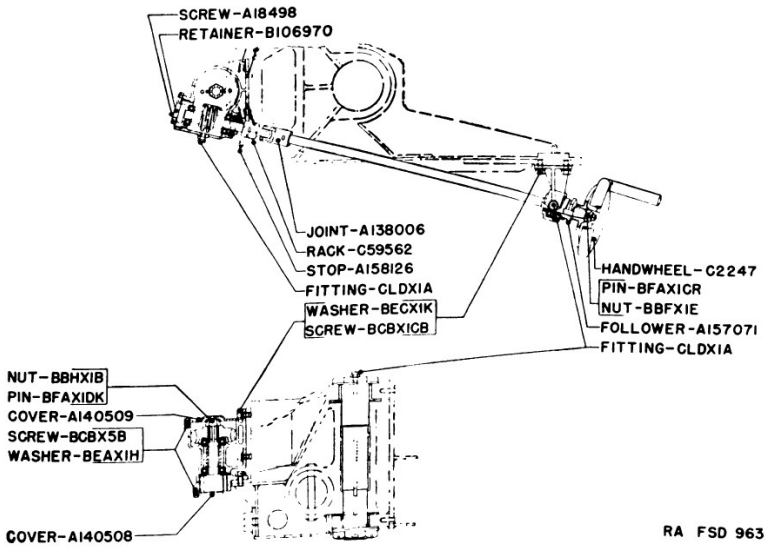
75-mm howitzer carriages, M3A1, M3, and M2A1—traversing mechanism.
